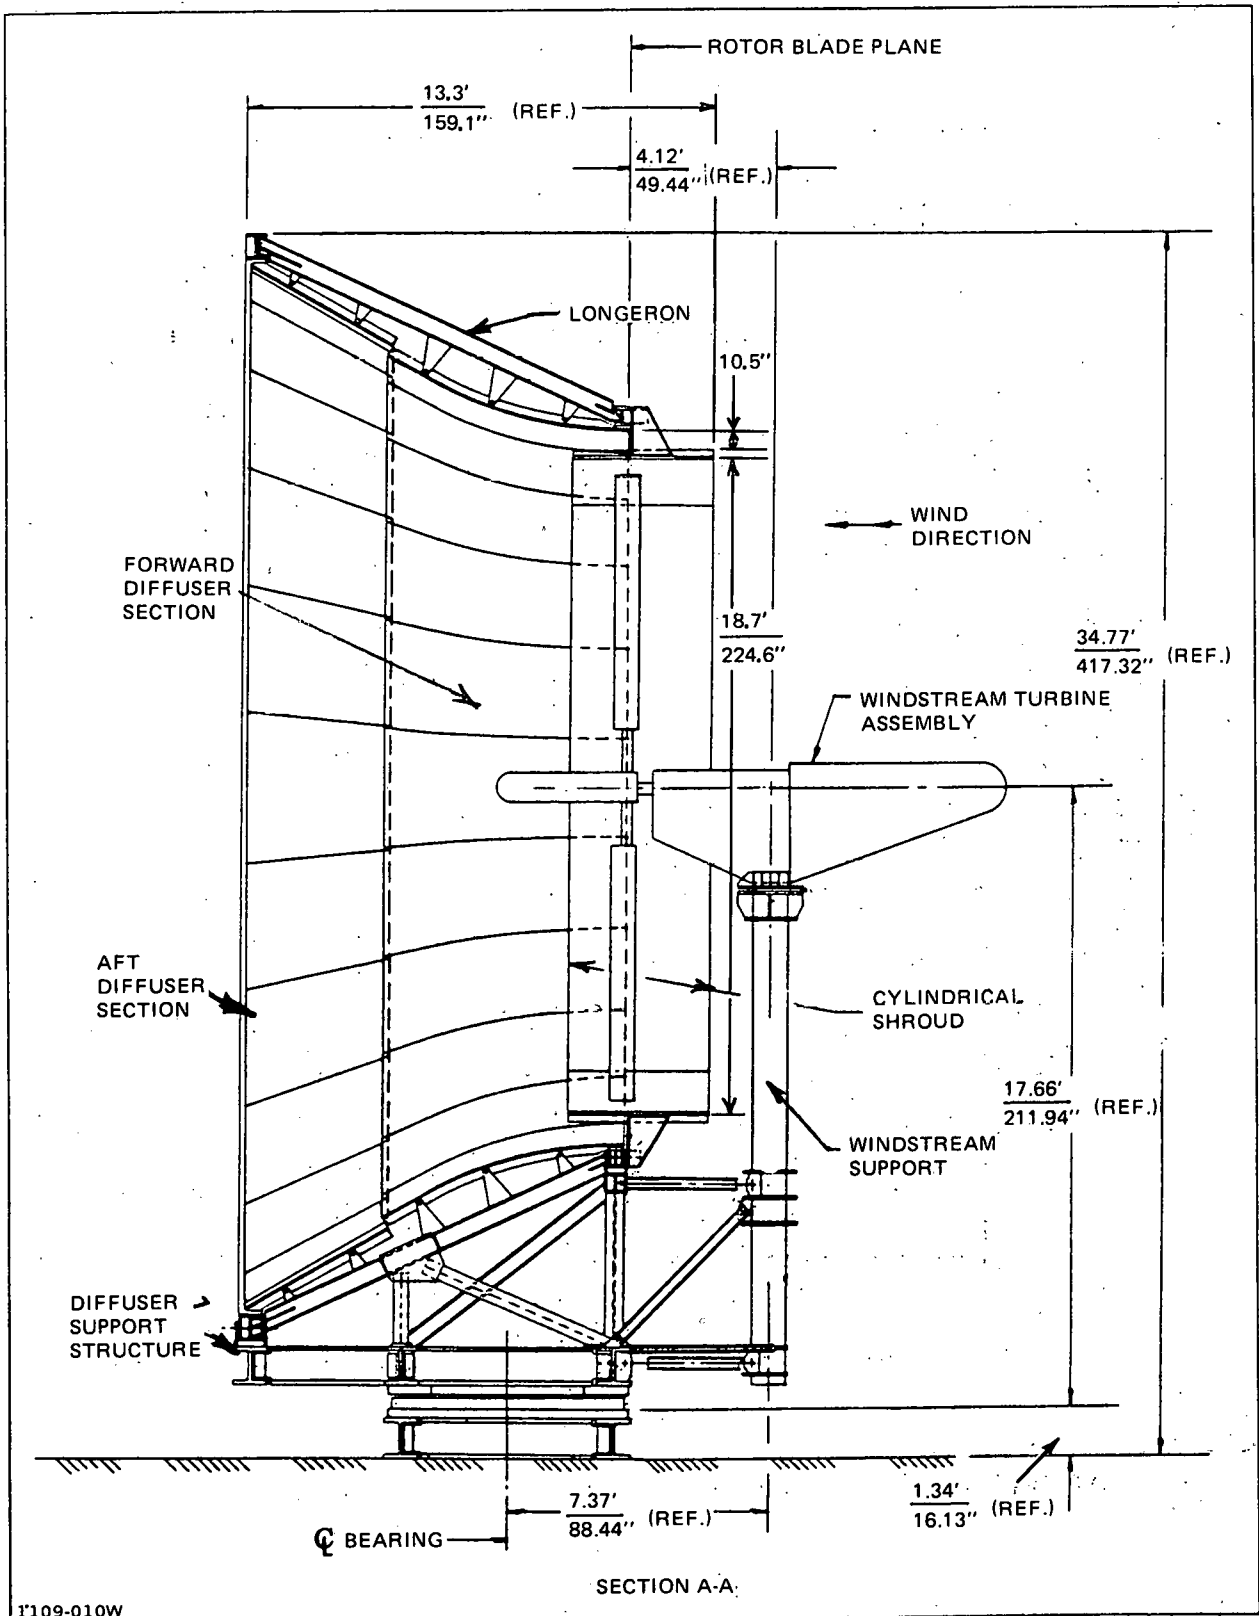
Engineering Design of DAWT Field Test Article – Side View. Thin, Formed Steel Skin; External Truss; Bolted Assembly; Roller Bearing Base
